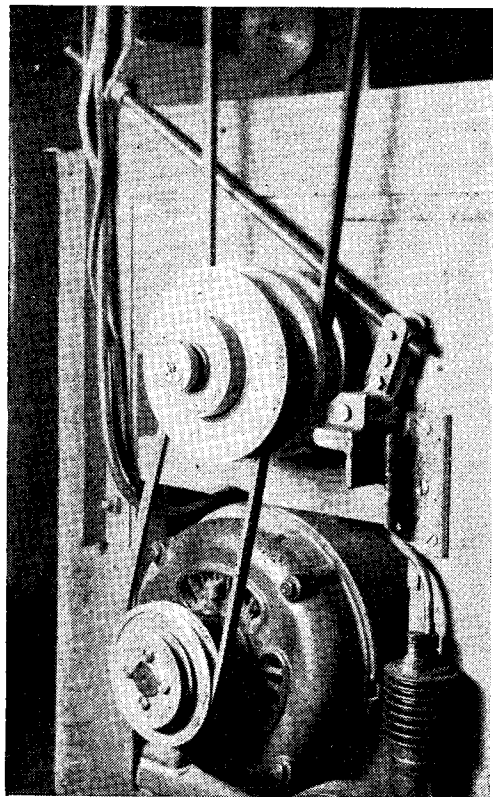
Infinitely variable gear mounted on the end of the lathe bench
